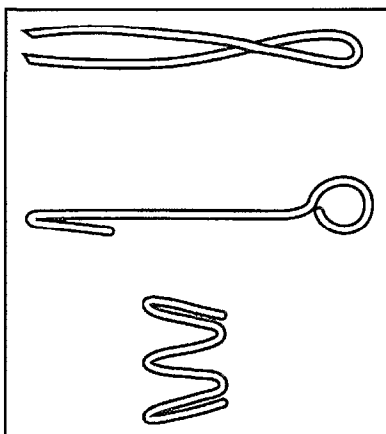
Top to bottom: Tweezers, balance-hole easing tool and rocker gauge, all made from coat hanger wire.
